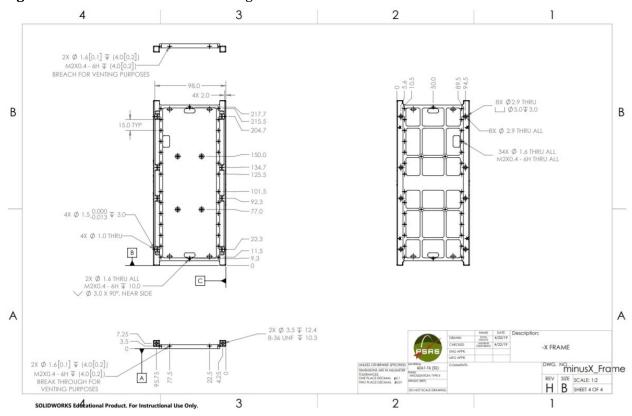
2 of 3 Dimensioned Drawing of the minus X OreSat Frame
